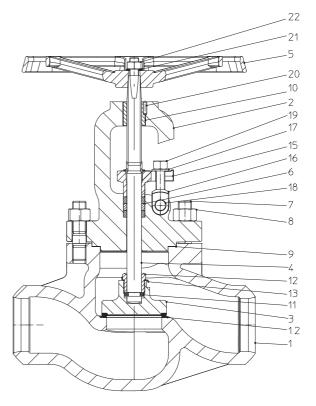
STOBU staight through with butt weld ends DN65-100
